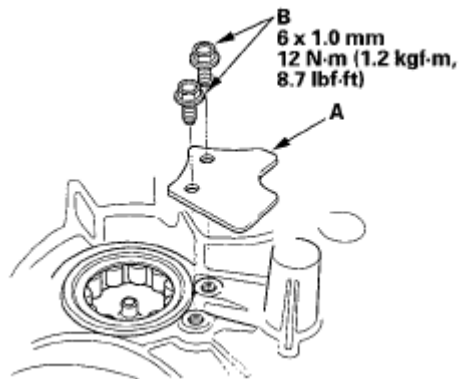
Identifying Bearing Set Plate With Bolts With Torque Specification
